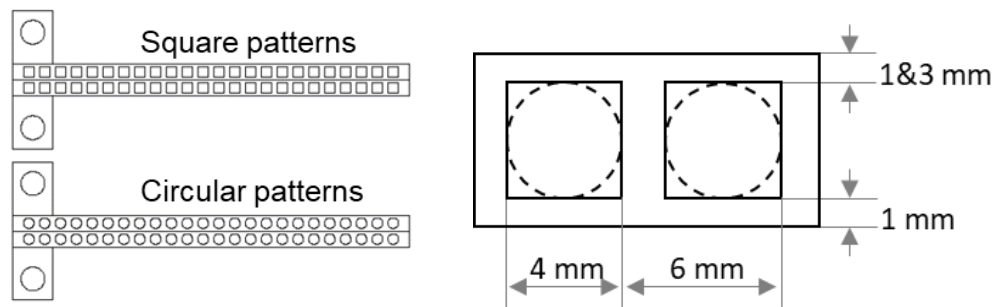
Geometry and dimensions of the subsurface channels of bio-inspired DCB samples.
